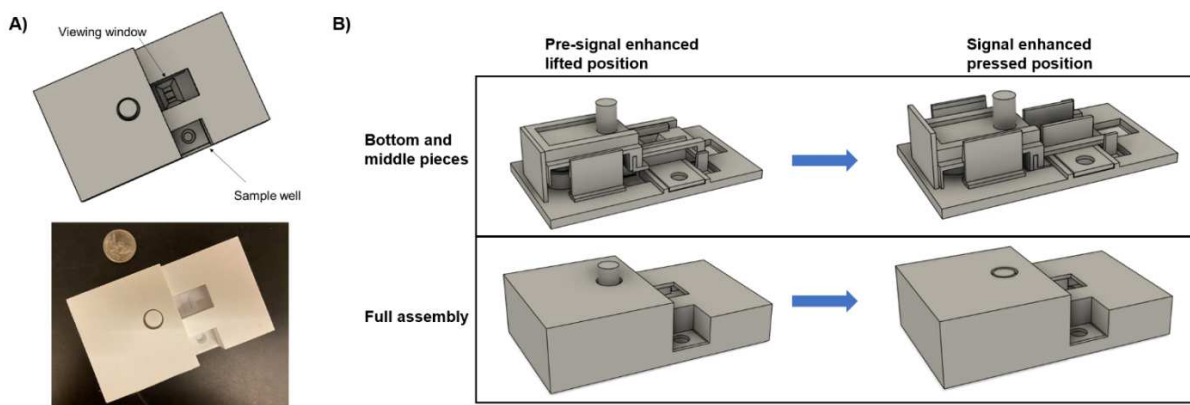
Overview of the fully assemble casing and button pressing mechanism. (A) CAD drawing (top) and 3D printed (bottom) full casing assembly with labelled viewing window and sample well. US quarter included for size comparison. (B) CAD drawings showing the casing before and after pressing the middle piece.
